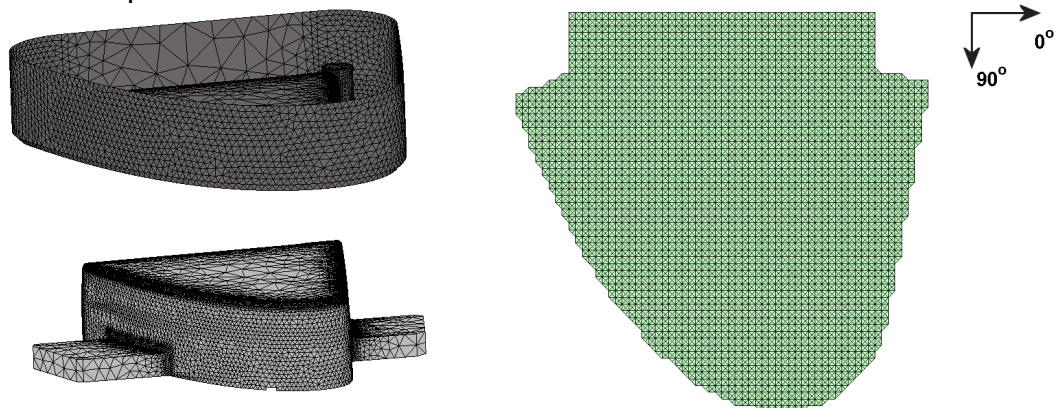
The discretized tooling on the left hand side and the blank shape on the right hand side.
